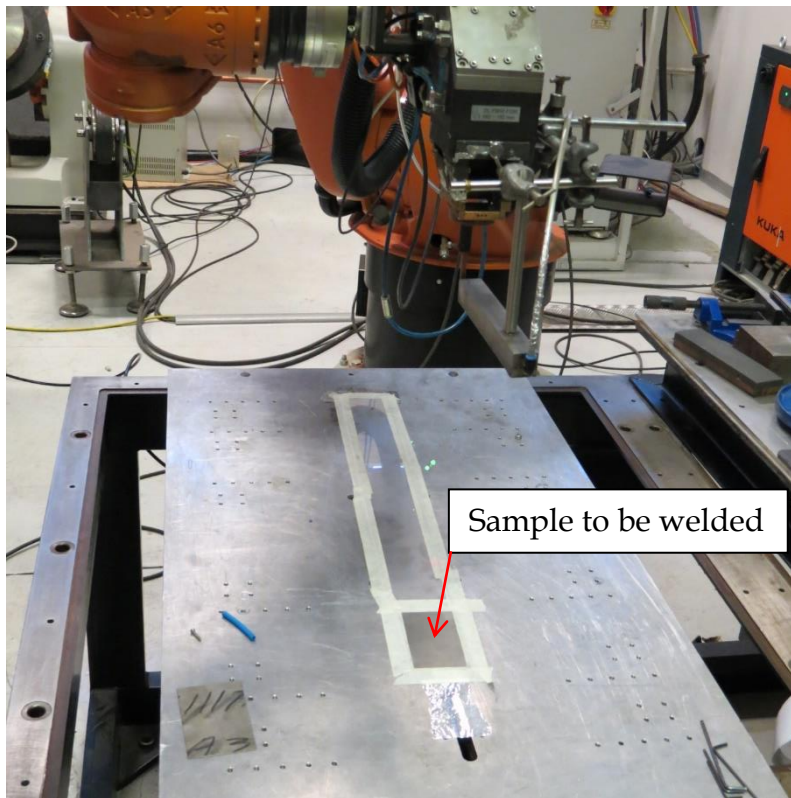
LBW set-up during welding. IPG YLR 3000 - ST fiber laser which has a maximum power output of 3 kW
